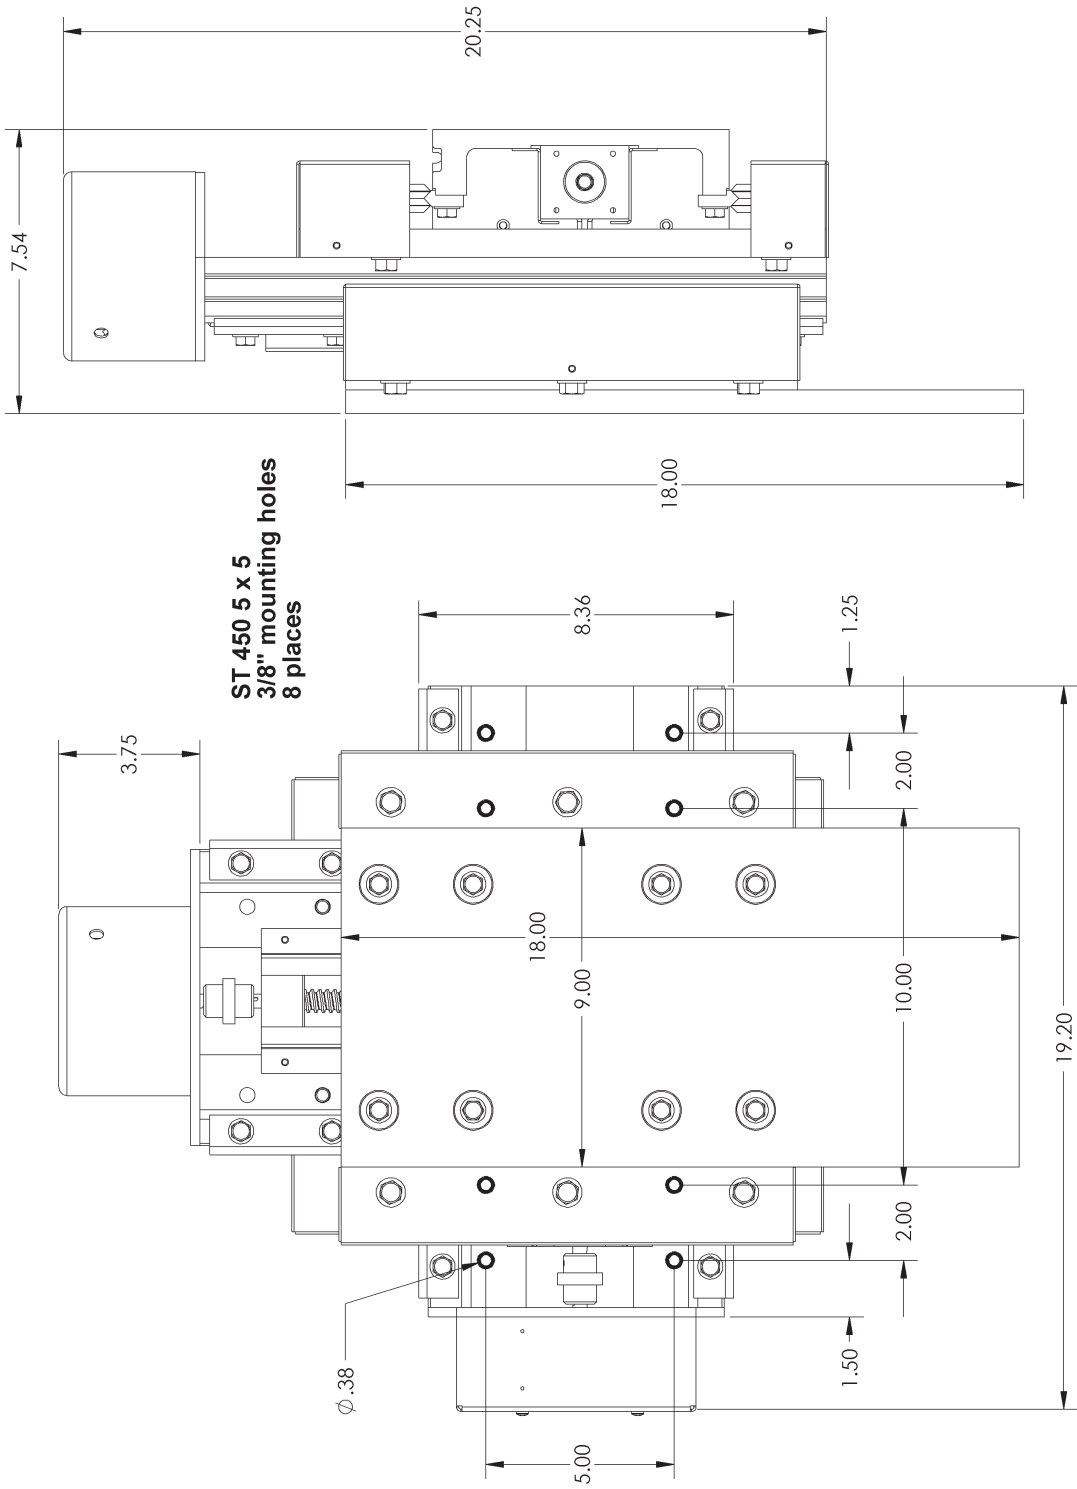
ST450 5 X 5 CROSS SLIDE MOUNTING DIMENSIONS
